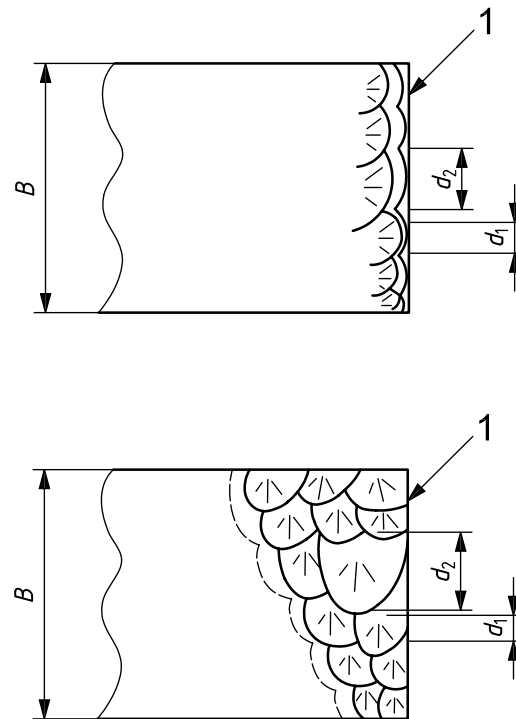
Post-test sectioning procedure for identifying fracture initiation microstructure in a through-thickness notched specimen
